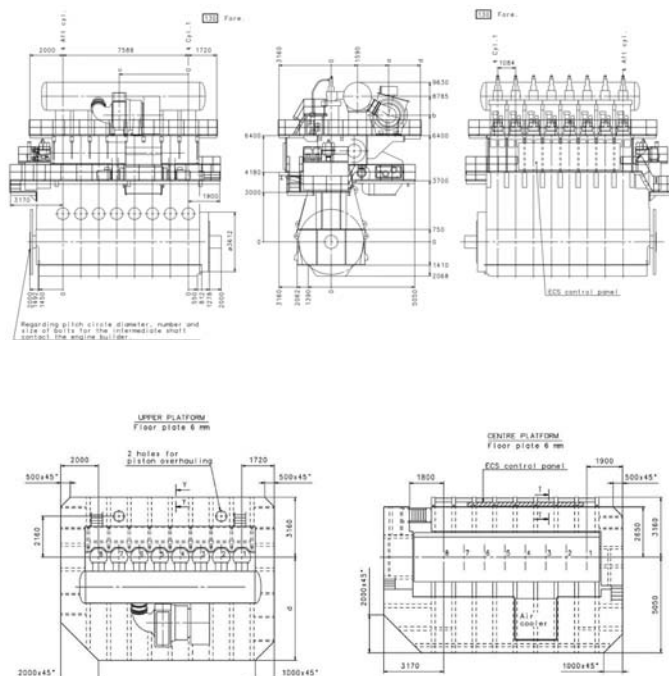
Outline drawings of MAN B&W 8S65ME-C8.5-TII Engine, [74, 75]
